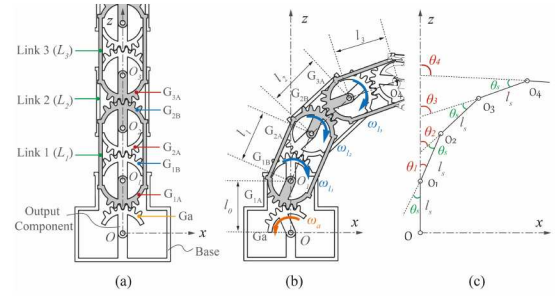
Sectional view of the spinal mechanism. (a) Extended state. (b) Bending motion. (c) Geometric analysis.
